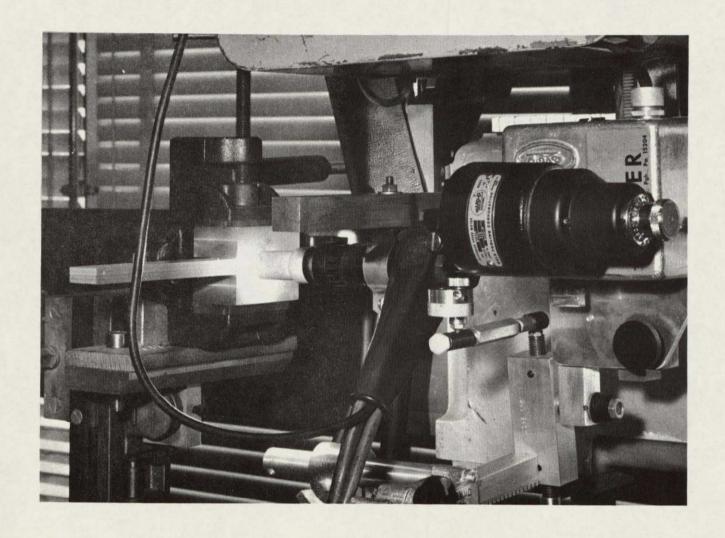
Schematic Illustration of Horizontal Fusion Spot-Weld Test.
